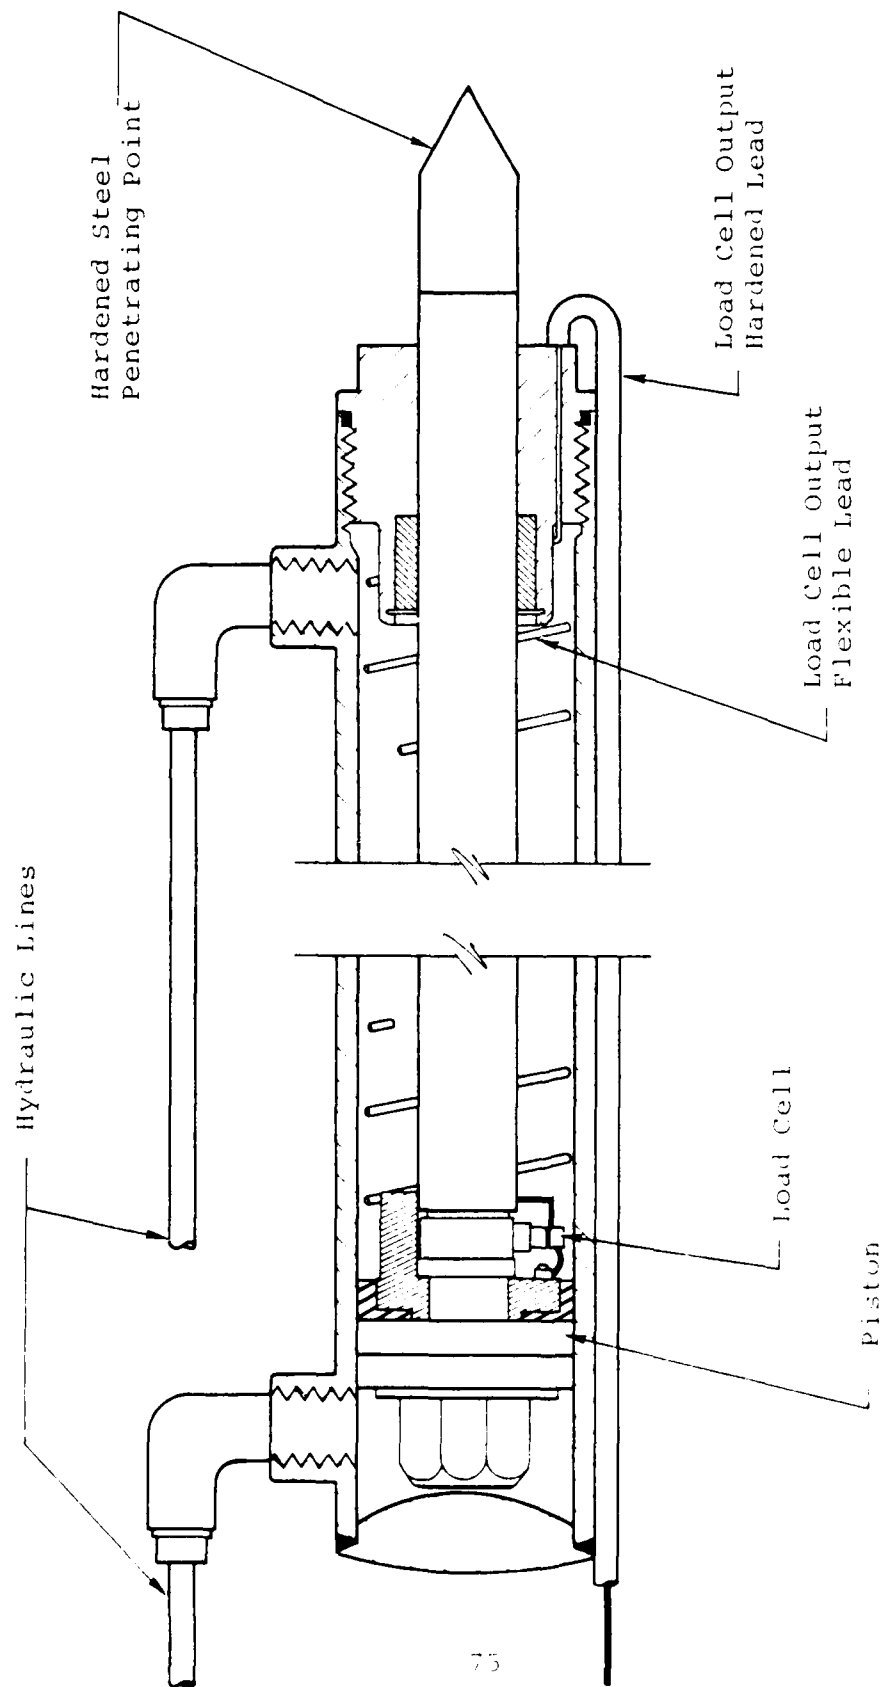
Construction Details for the Soil Strength Gauge-Penetrator.
